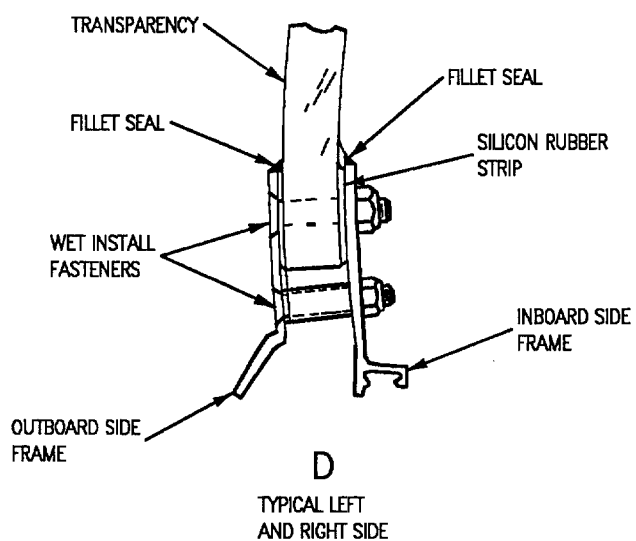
Inspection or Replacement - Inboard Side Frame (Sheet 4)
